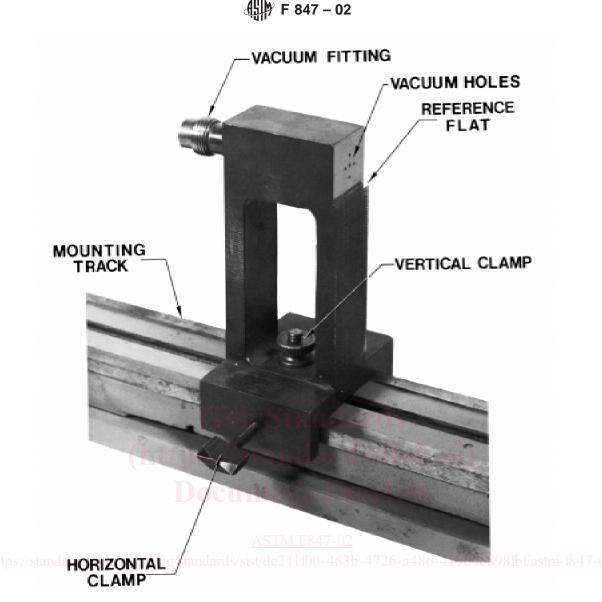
Photograph of Wafer Holding Fixture and Mounting Track
